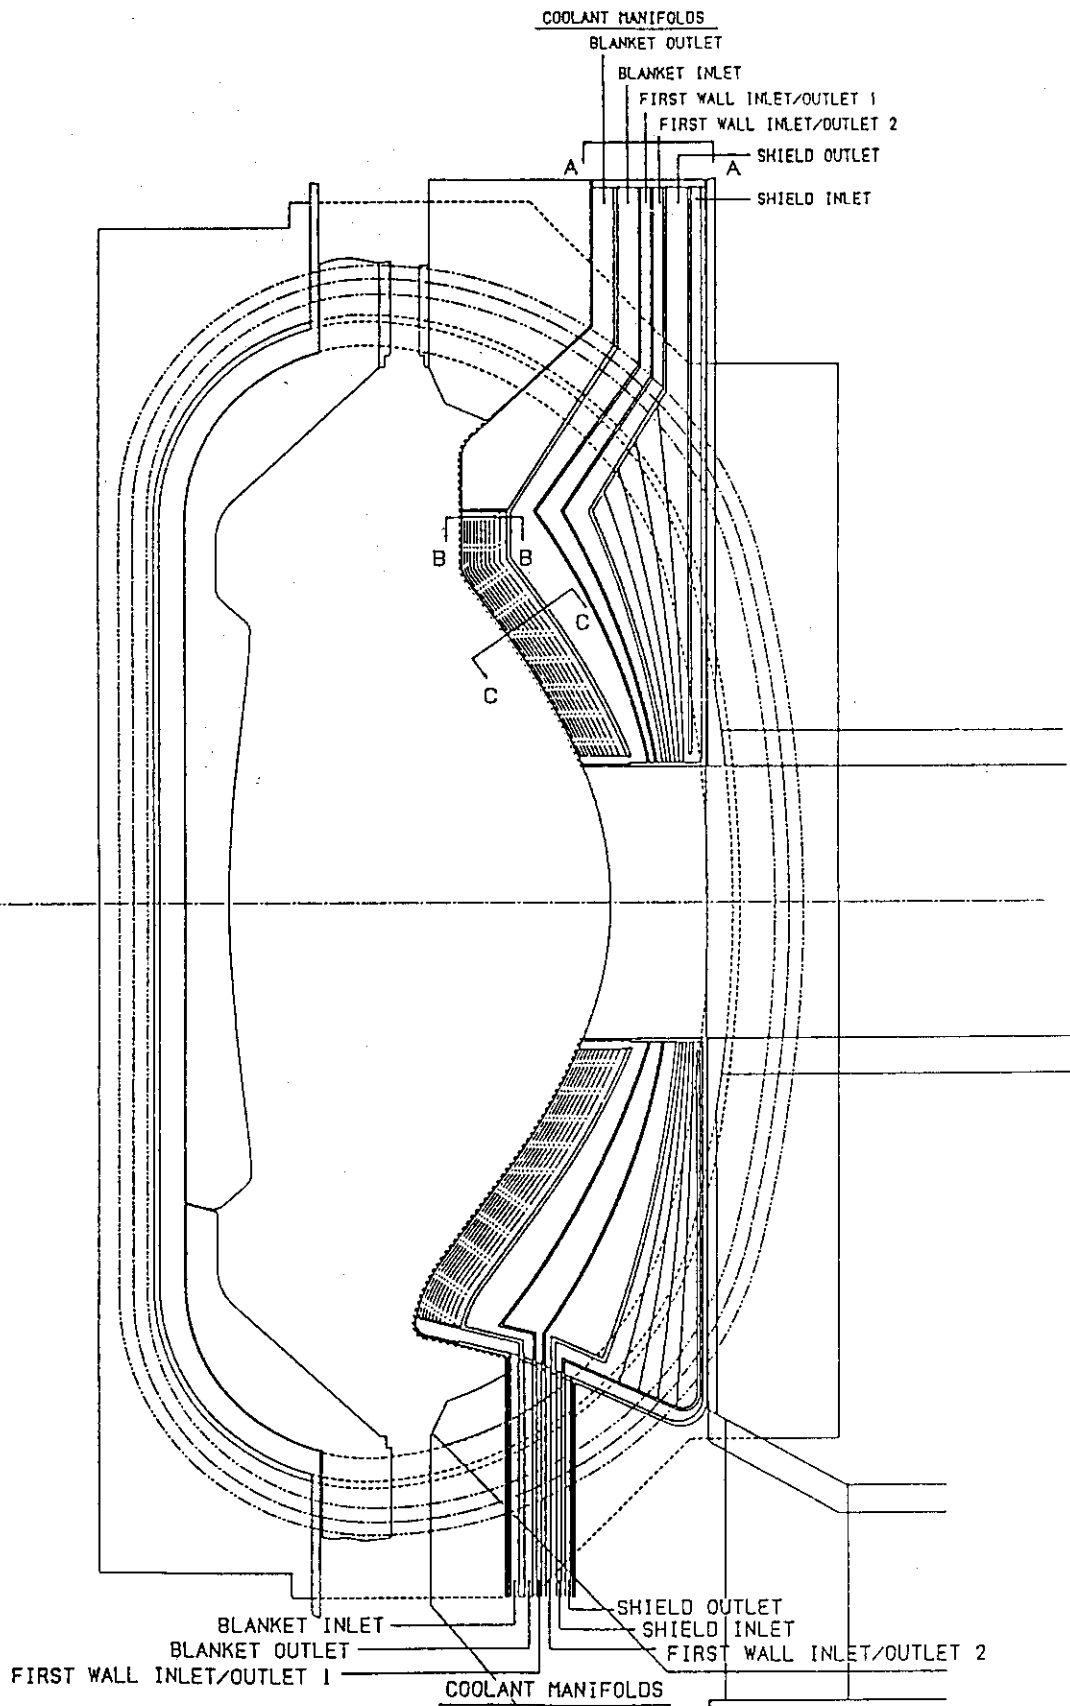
Elevation view of outboard central module (mixed pebble bed blanket)
